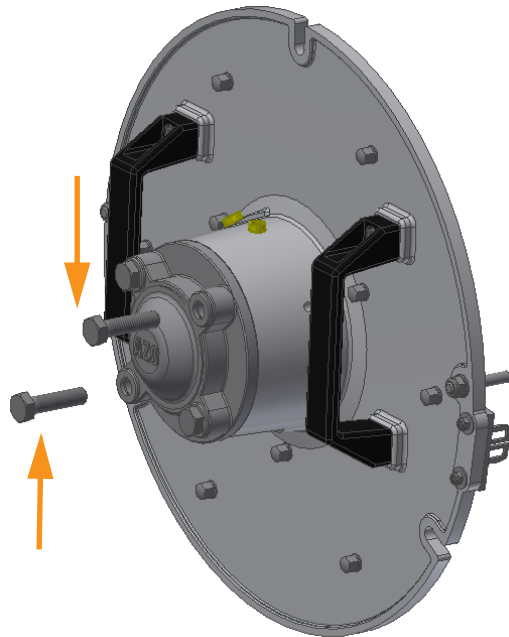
Cover housing: Removing bolts for fastening safety cover
